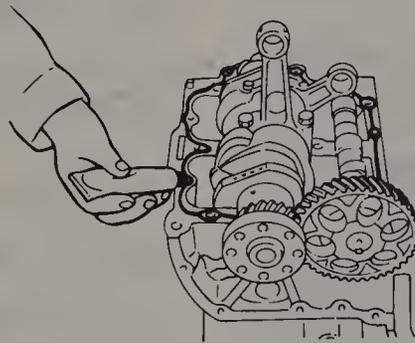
Be sure to apply a thin layer of the specified liquid gasket sealer to the crankcase mating surfaces before rejoining them (Sec 31)
